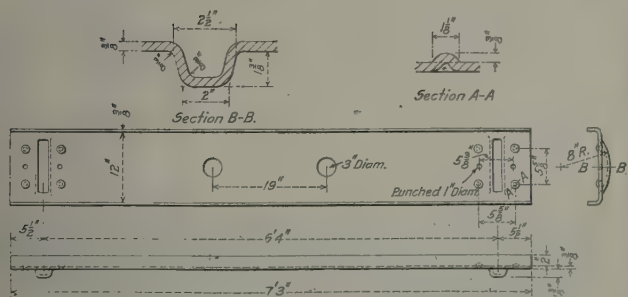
Sullivan Spring Plank for Trucks of Caboose Car.
